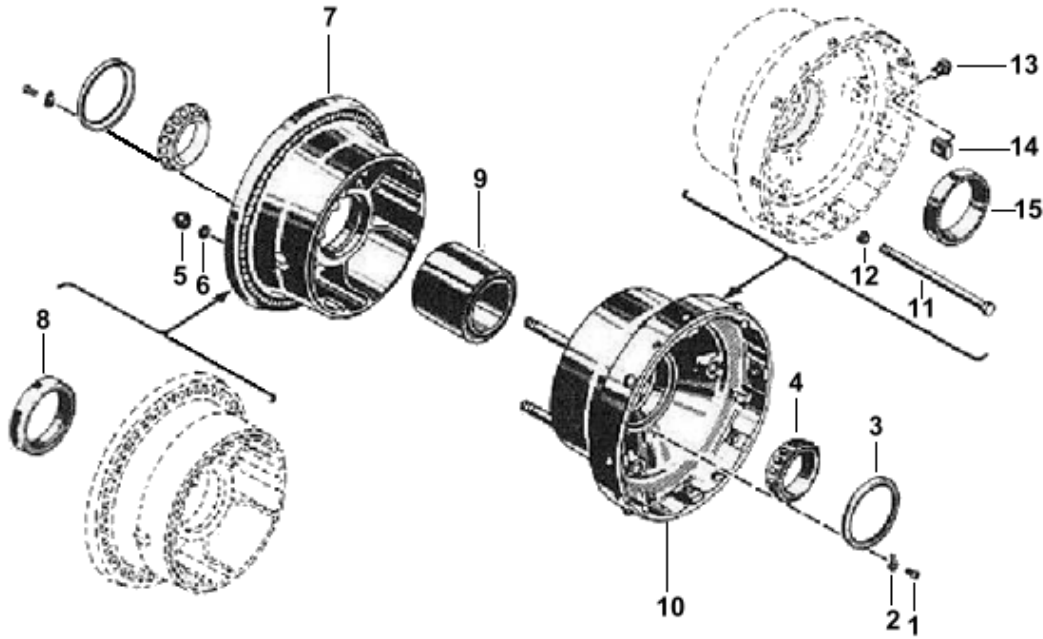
MW2 – TUBE TYPE MAIN WHEEL
